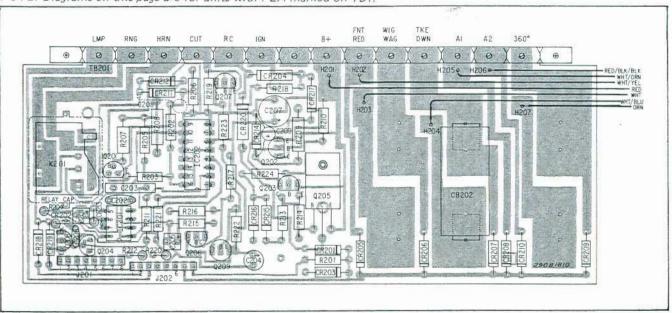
B. Model CC1 Board Assembly Control Module Parts Location Diagram (for units with FLA label on TB1).
